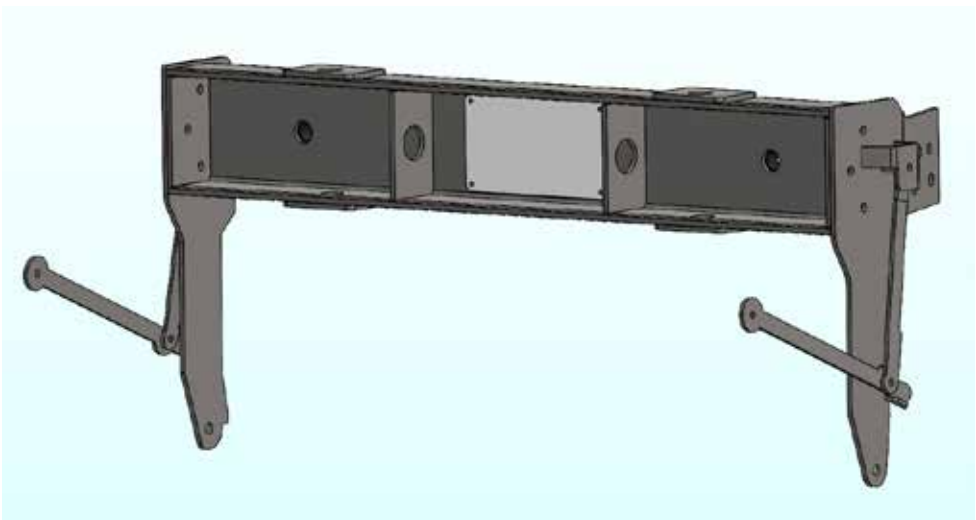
1 Pair Steel mounting brackets including hinge stays (fitted to bar)
